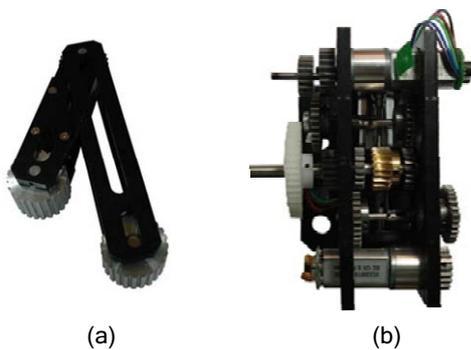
Two parts of selectable wheel-track mechanism; (a) track-link and (b) clutch part.
